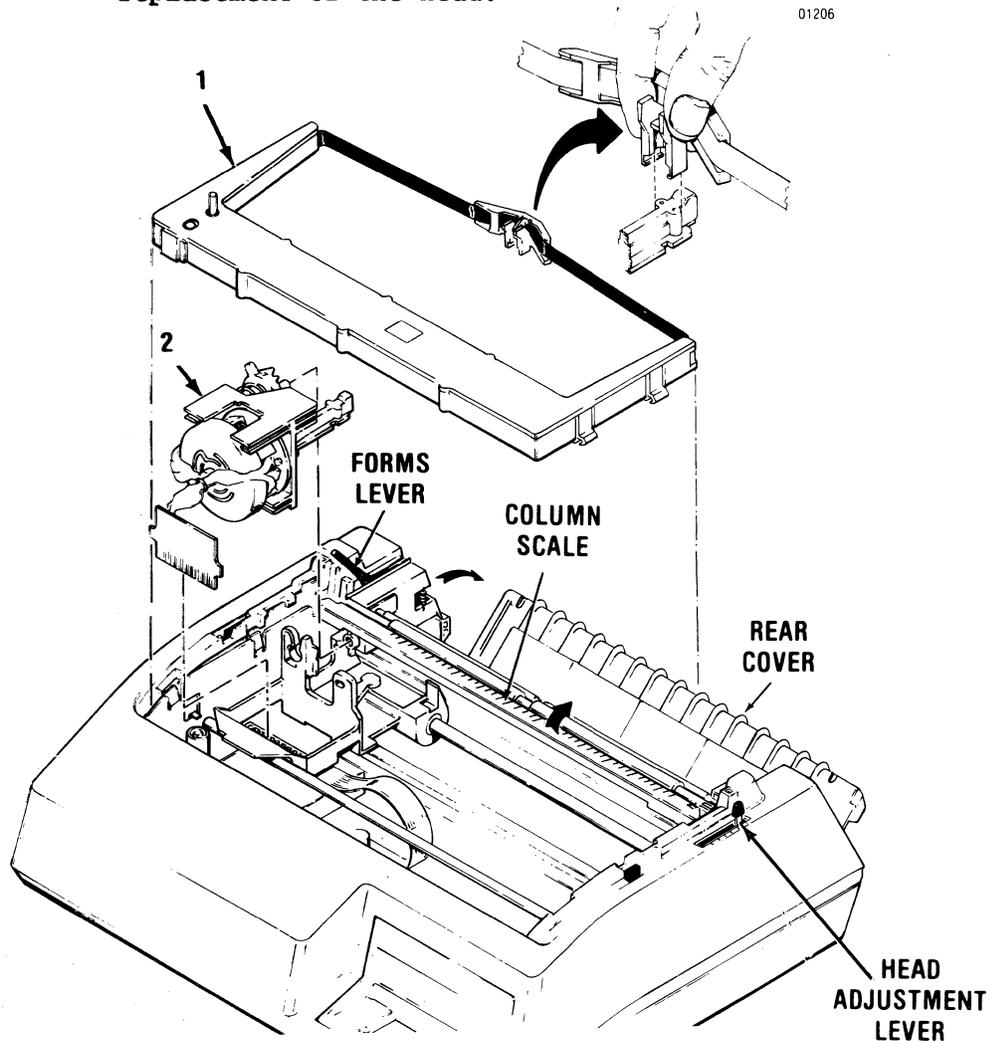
REMOVAL/REPLACEMENT, RIBBON CASSETTE AND GUIDE, PRINT HEAD ASSEMBLY
